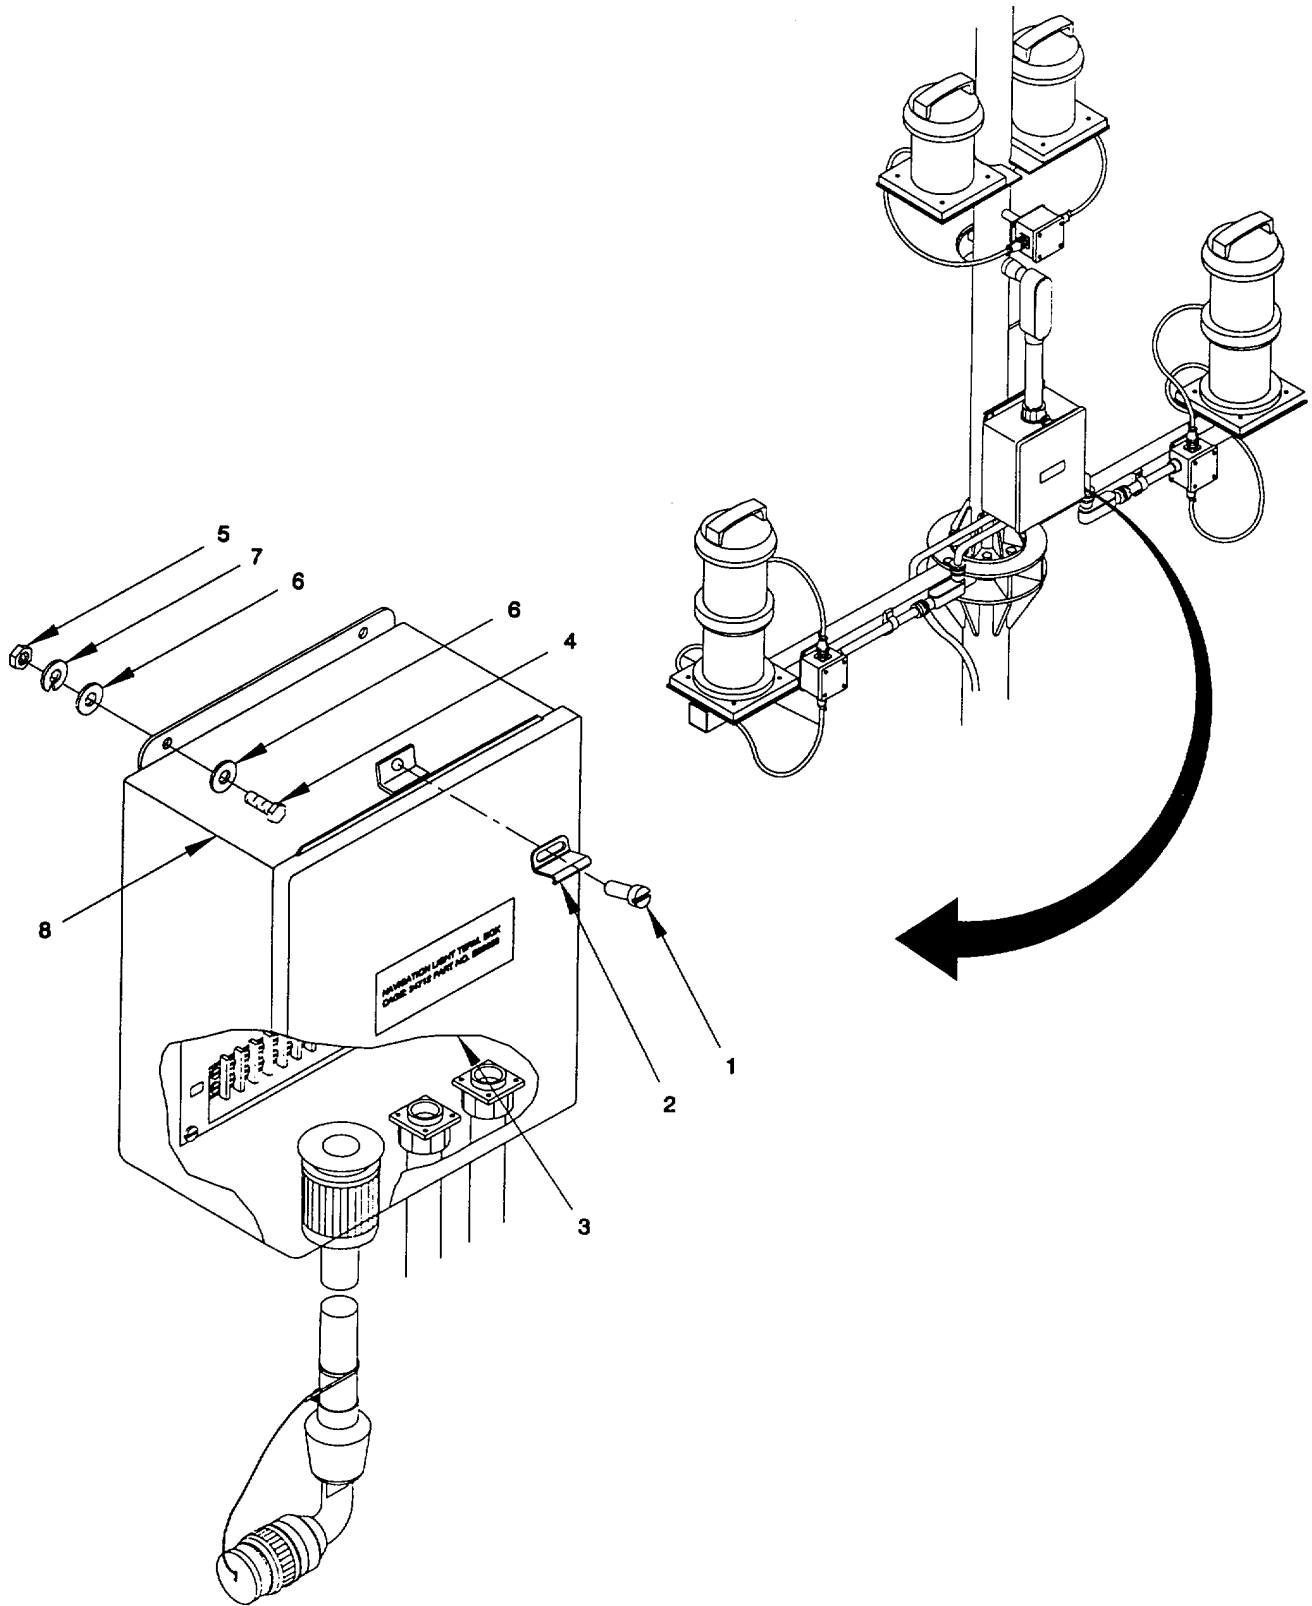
Terminal Box, Main Mast Navigation Assembly, Remove/Install.
